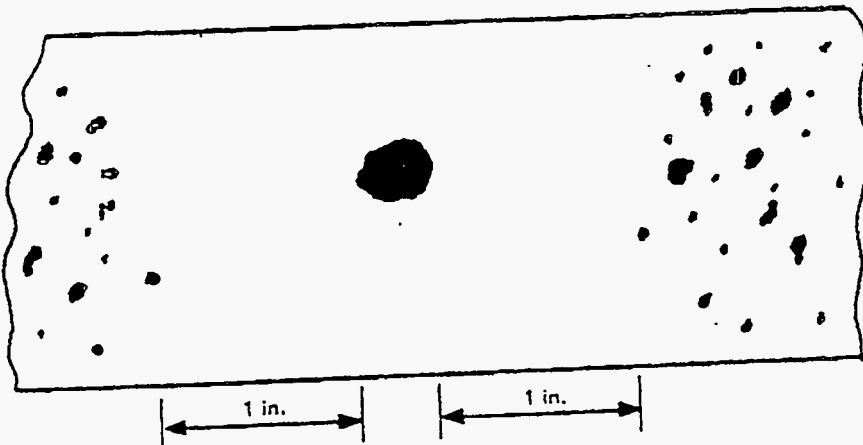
CHARTS FOR t OVER 2 in. to 4 in., INCLUSIVE
